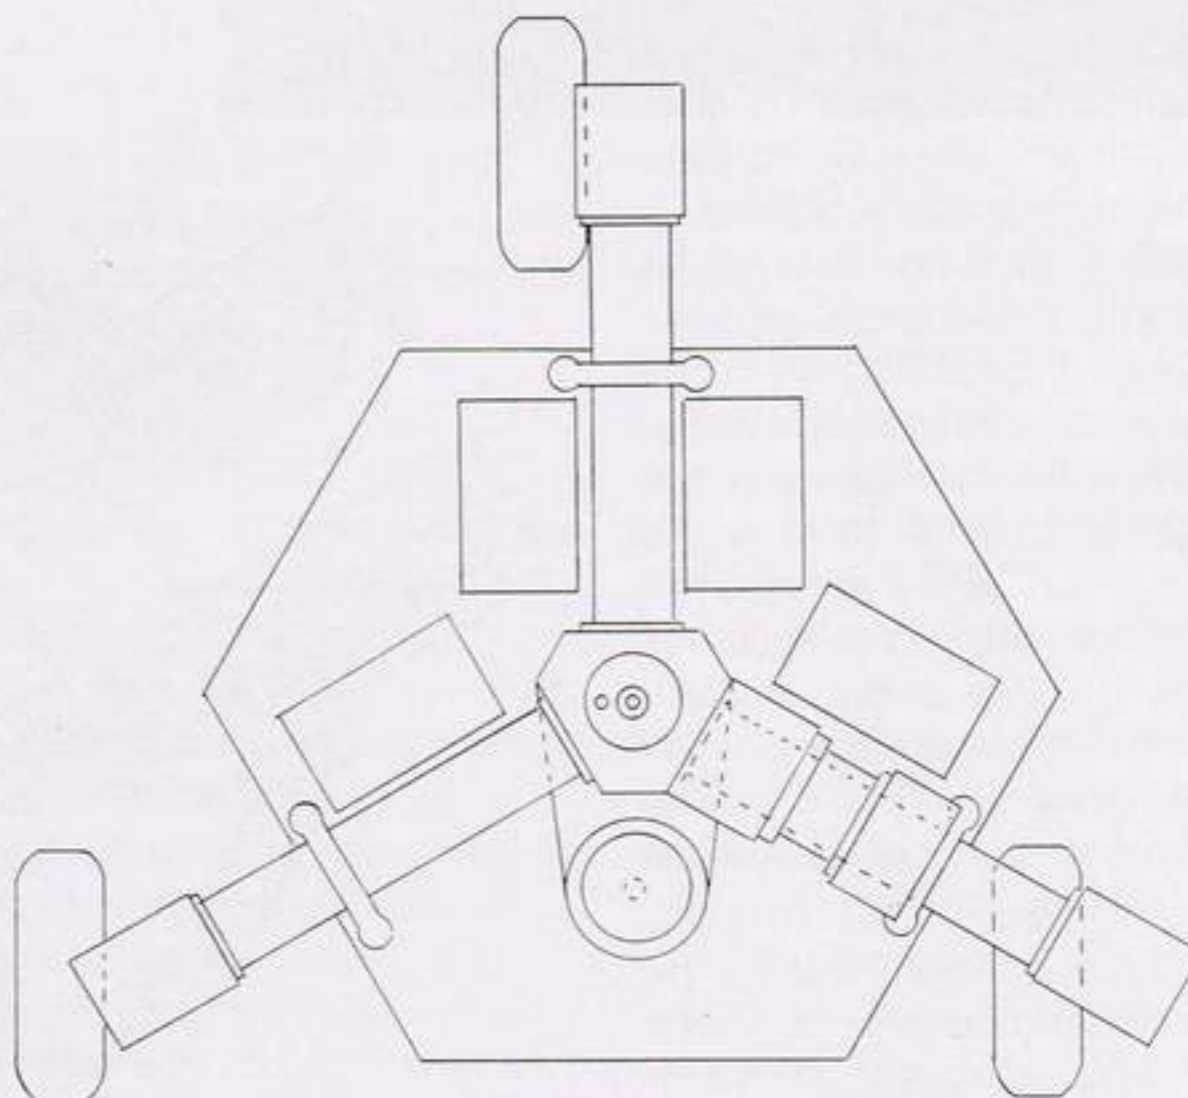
Layout of the Synchro-drive base with concentric shafts.
